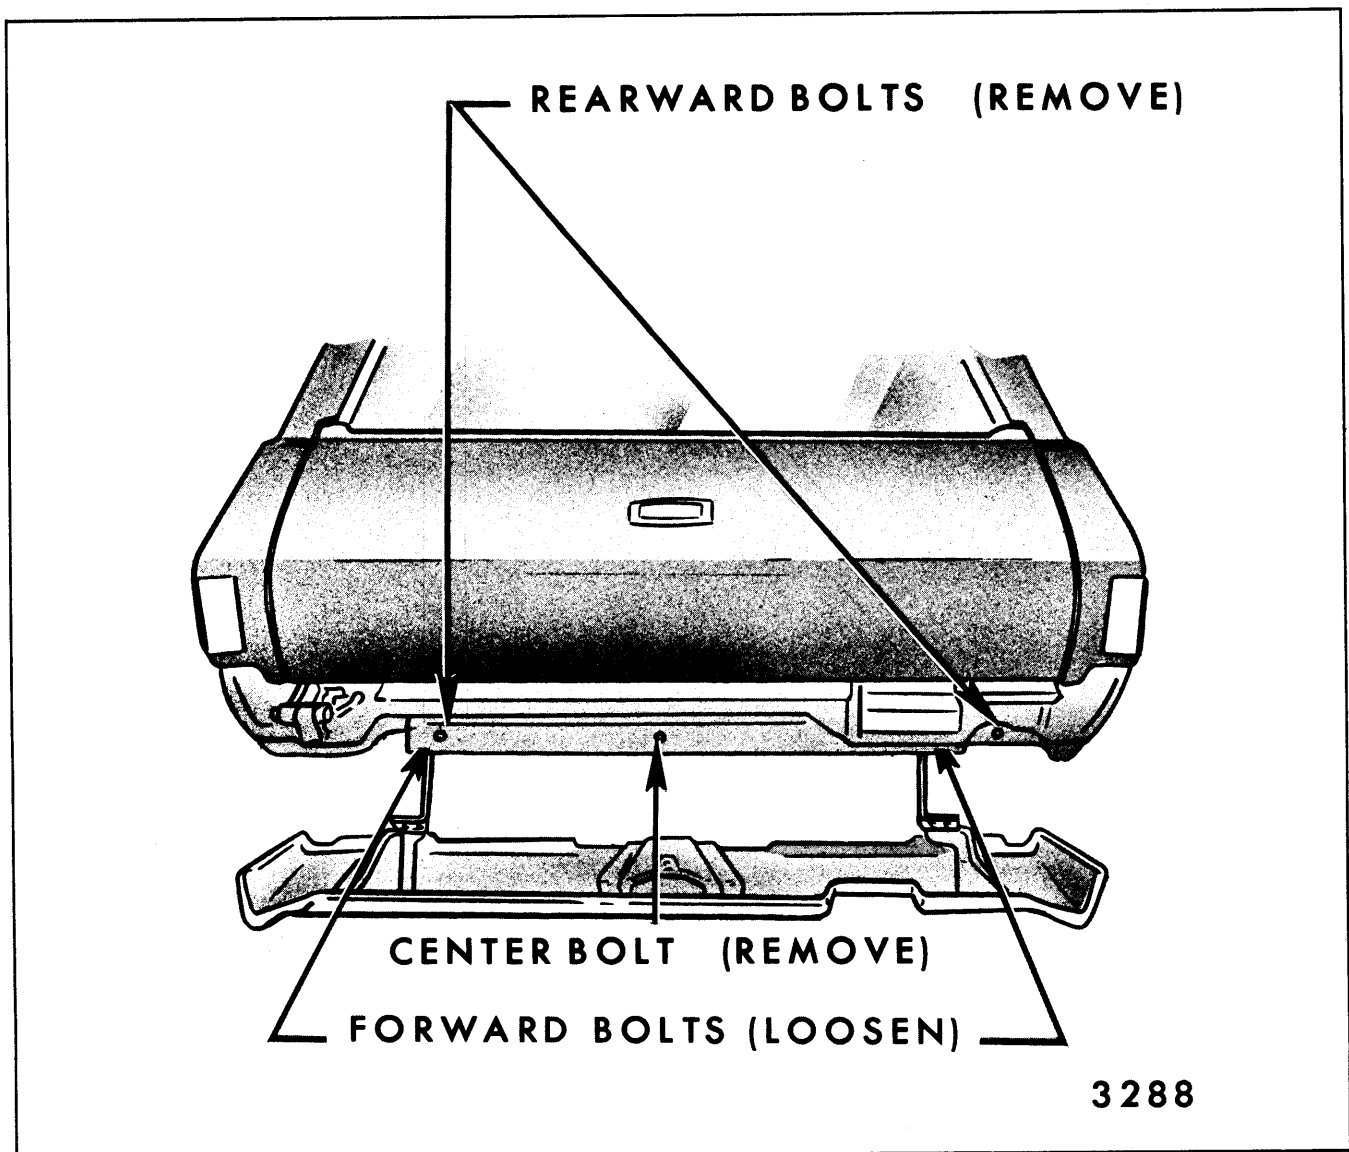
Bumper Removal - "A" Body Shown - "B" Body Similar
